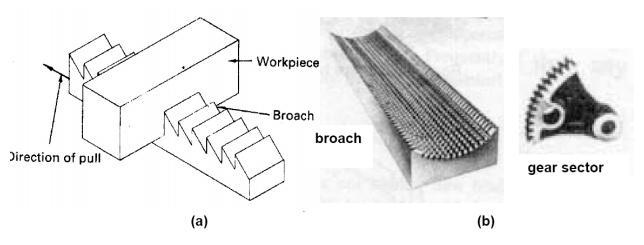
Typical external broaching (a) making slot (b) teeth of gear sector
